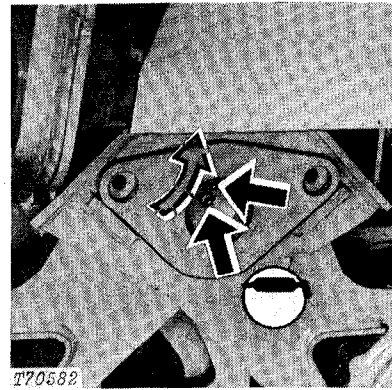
Shear Blade Pivot Shaft (Rear) (3 Points)
